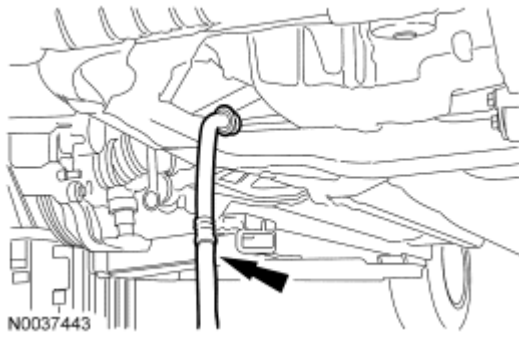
Locating Power Steering Pressure (PSP) Tube
